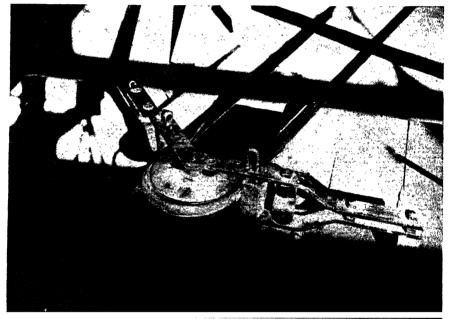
Manual pipe-bending tool. (A. M. Byers Company.)
